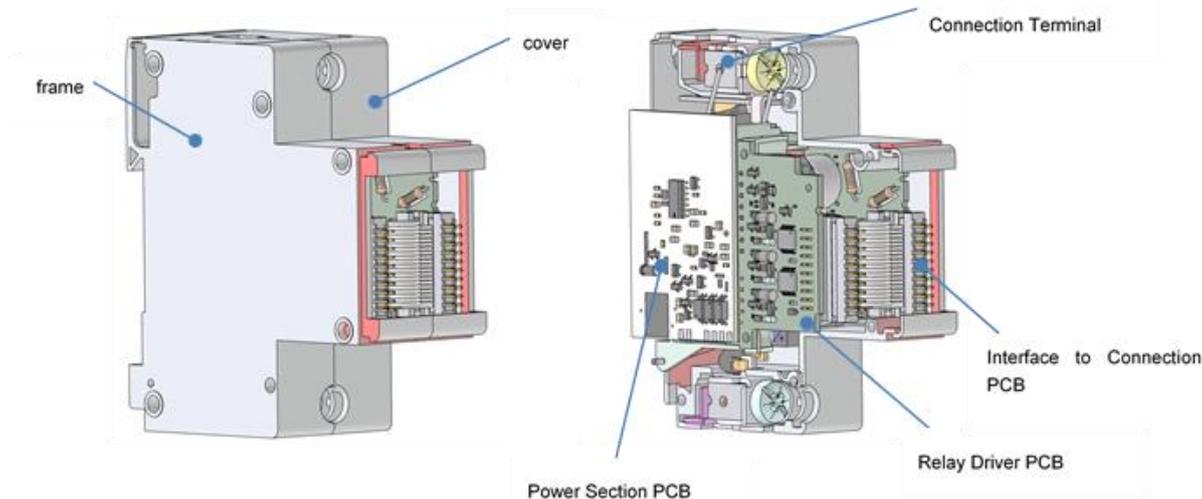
Single pole 3D-CAD design of Demonstrator-1
